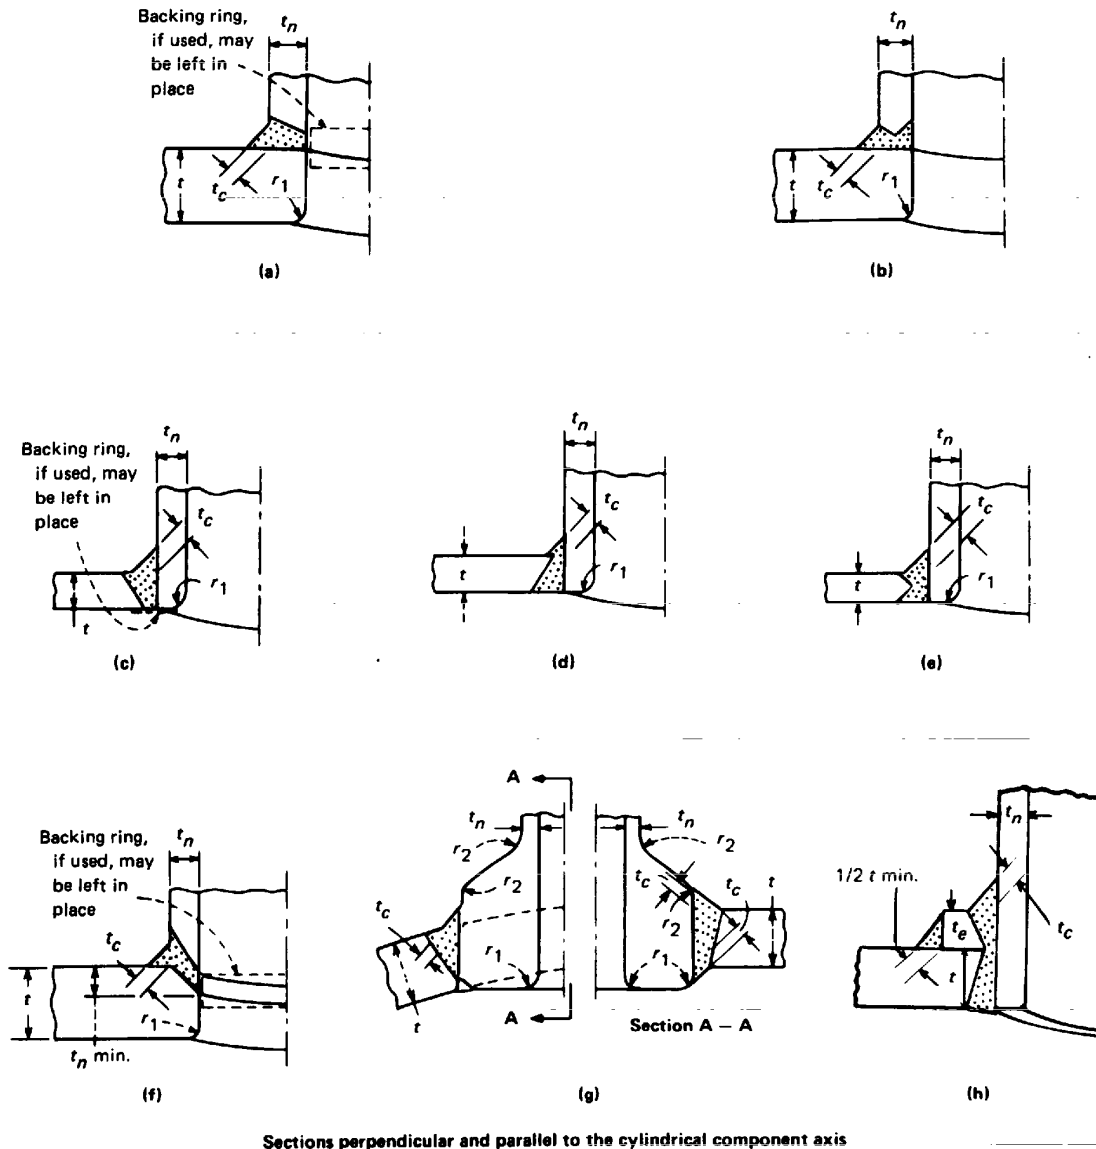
(b)-1 NOZZLES, AND BRANCH AND PIPING CONNECTIONS JOINED BY FULL PENETRATION CORNER WELDS
